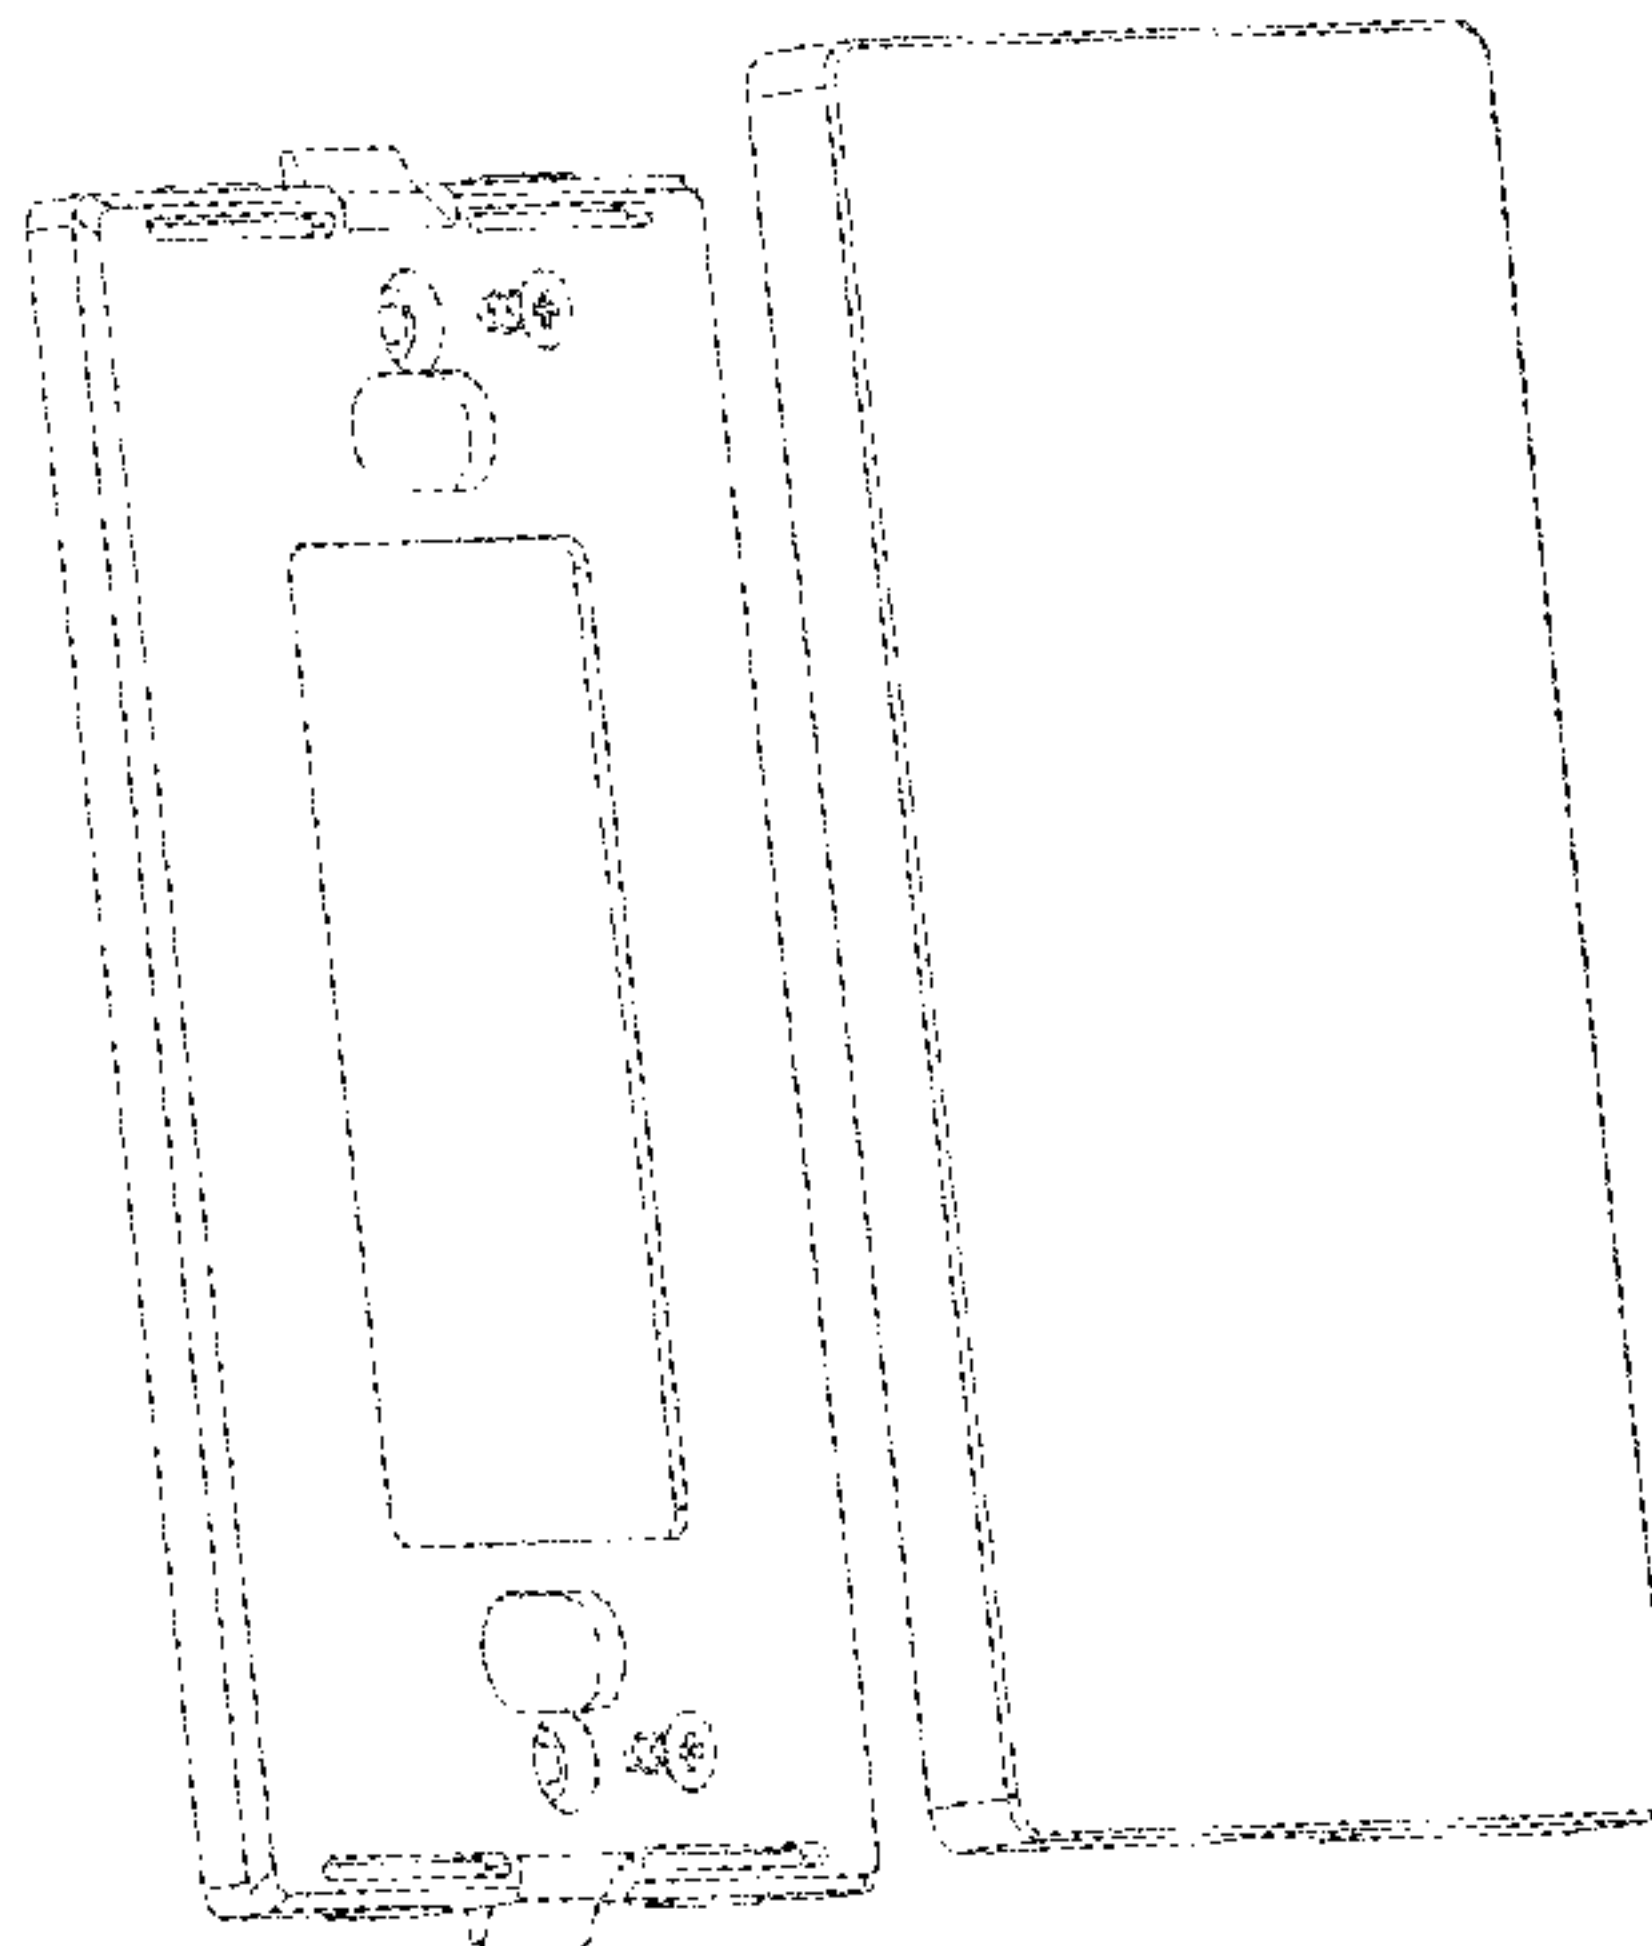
is an exploded view of the call out in FIG. 15 showing the ribbed portion in the end view of FIG. 15;
